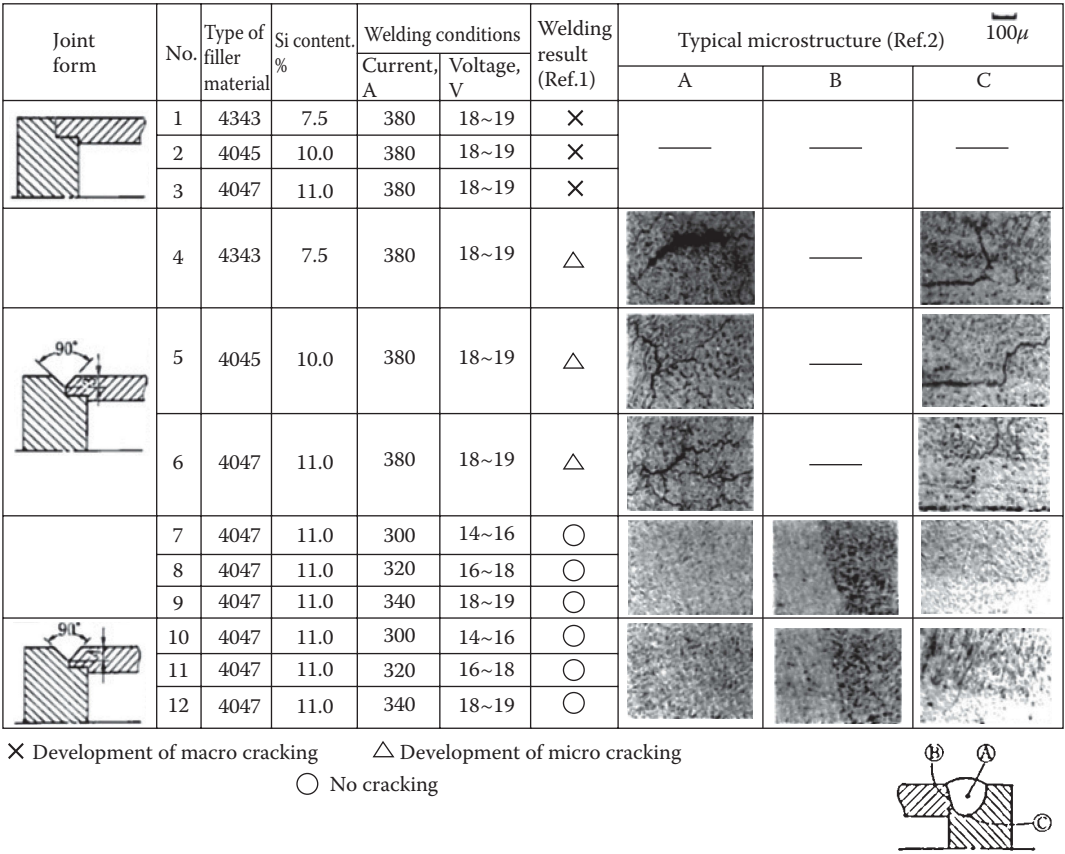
Results of experiments on pulsed TIG welding using high silicon filler material
